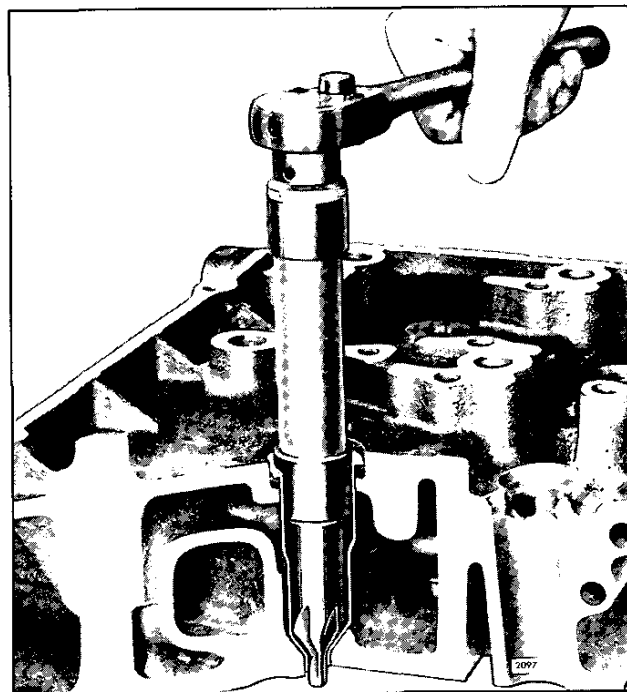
Reaming Injector Tube for Injector Nut Using Tool J 5286-9
